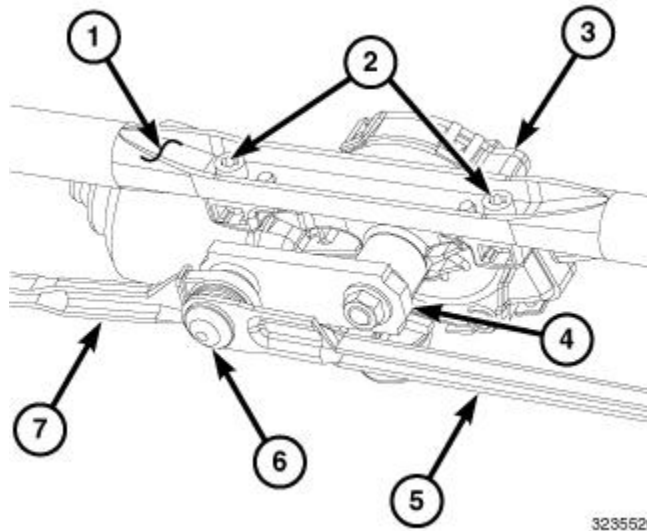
Module Bracket, Two Screws, Motor, Crank Arm, Drive Link, Bushing & Wiper Drive Link
